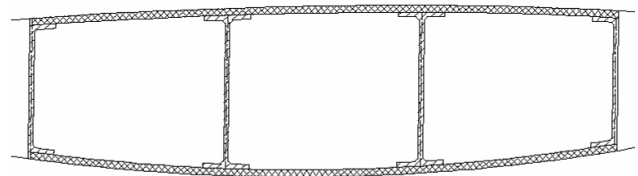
Composite multi-spar structural layout with monolithic panels without reinforcement
